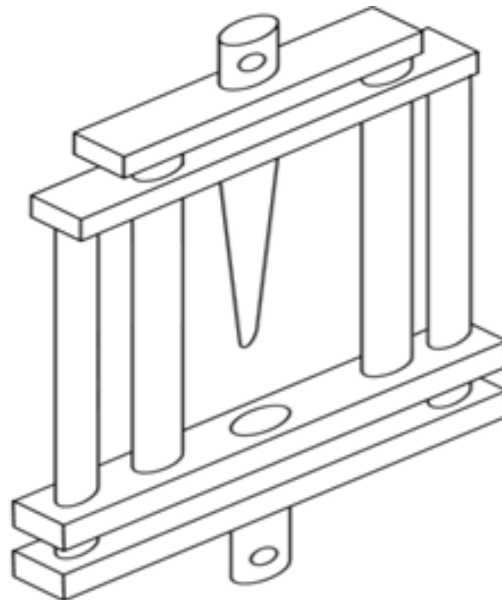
COMPRESSION JIG WITH CONICAL PLUNGER AND HOLE ON THE PLATFORM
